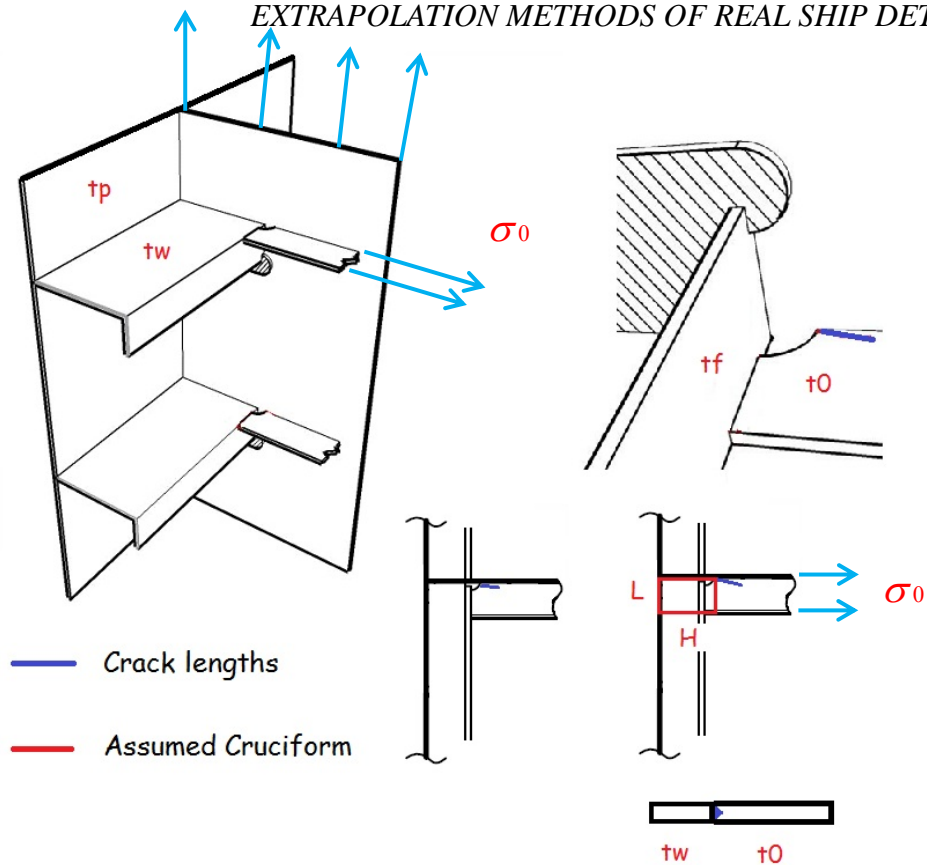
Situation II of Cracks at the connection of side shell longitudinal, to vertical web frame
